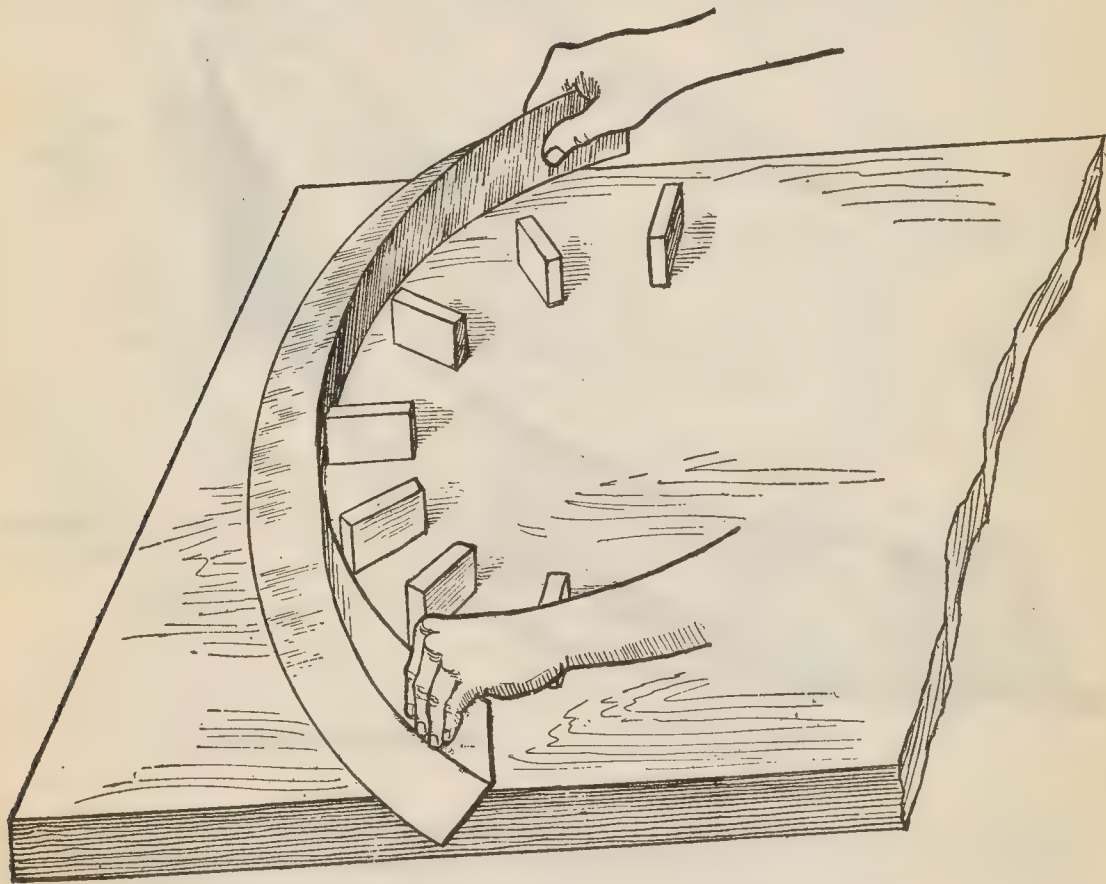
,541.—*Beating lead flashing, 6.* Making first bend over form.
